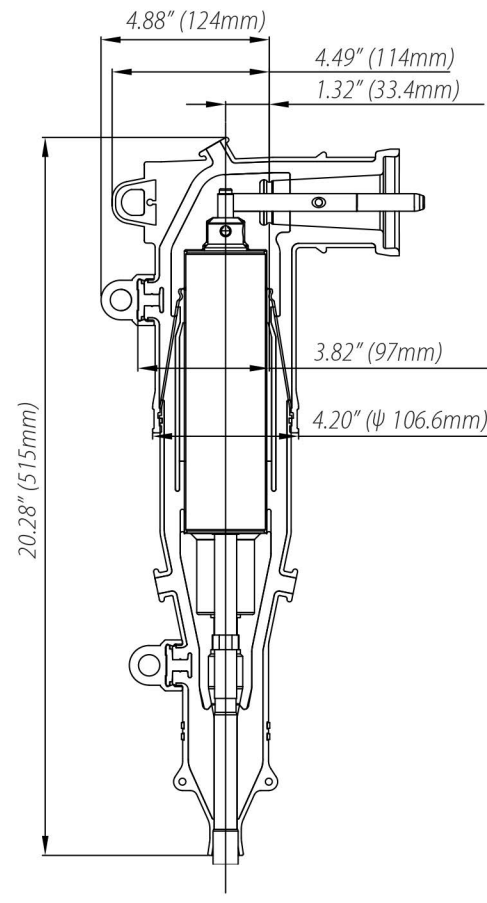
Dimension Info When Hi-Tech Fuse Installed.
